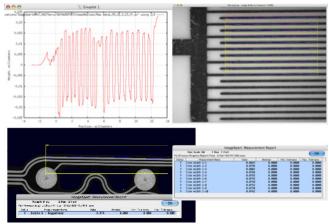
Machine Vision Based Inspection, Printed Electronics
